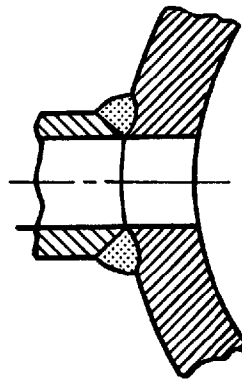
BUTT WELDING FOR CONNECTIONS¹
